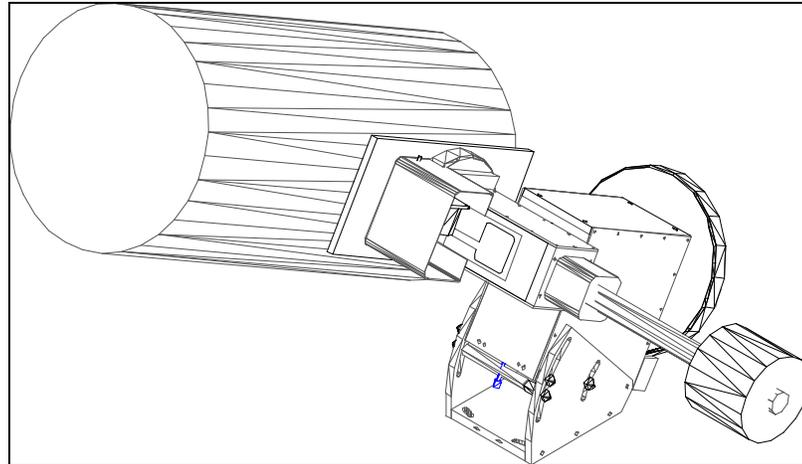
Perspective drawing of the Paramount with a C-14 tube assembly.
